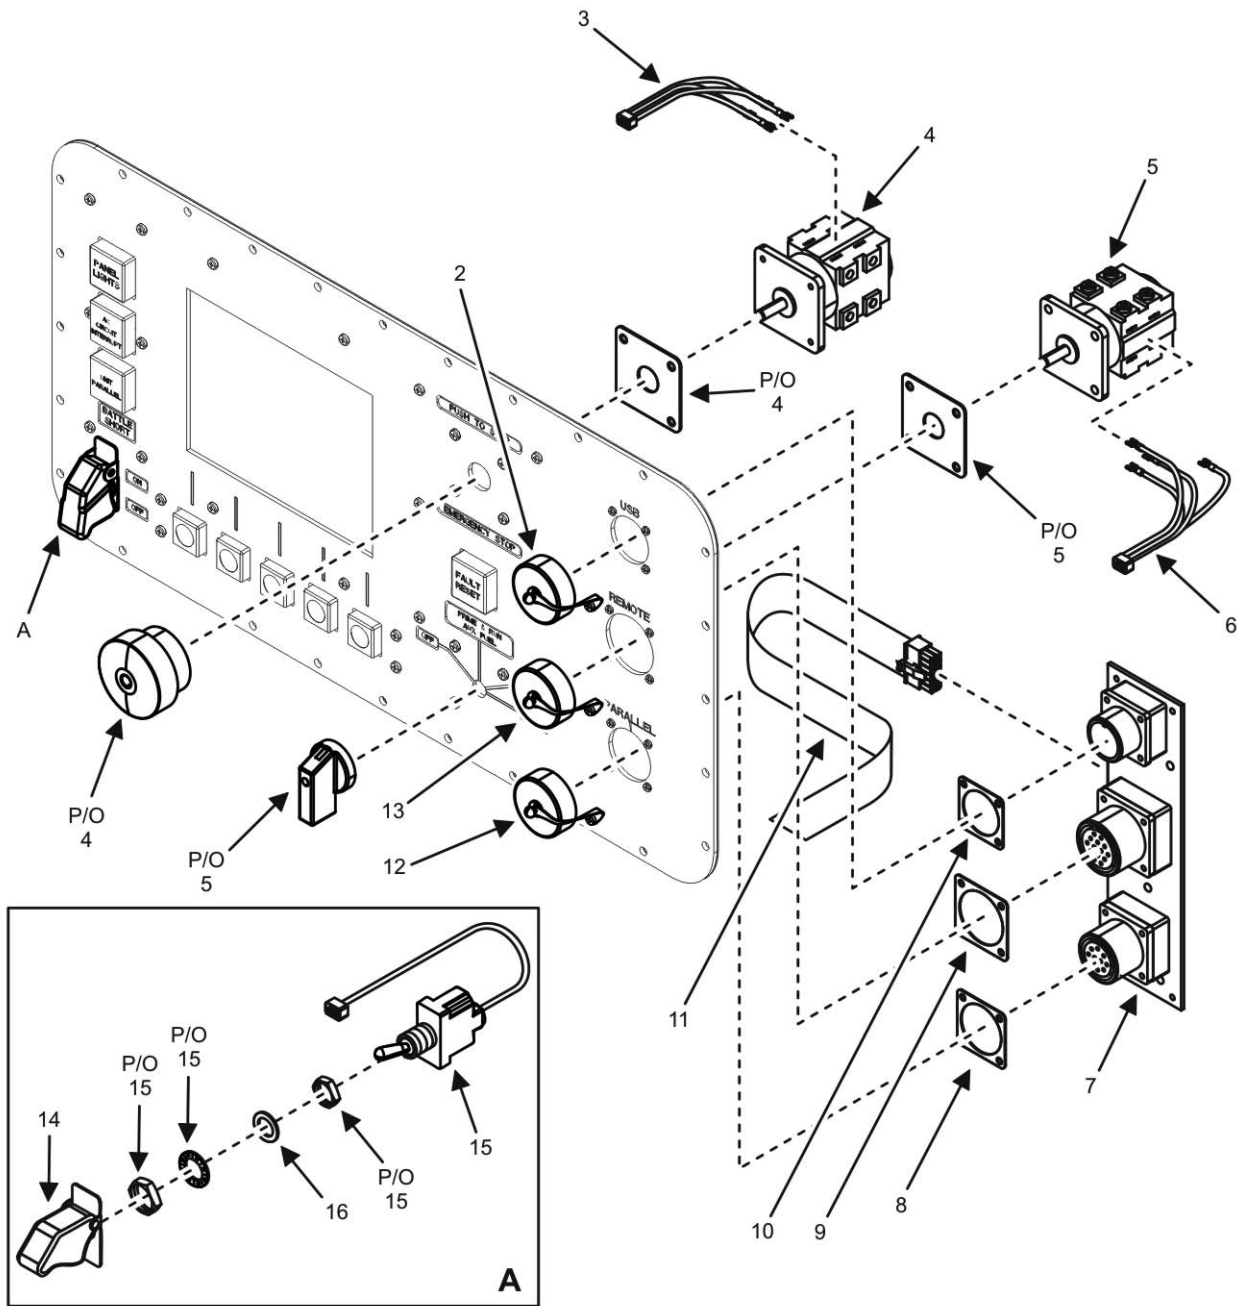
DCS Control Panel Assembly (Sheet 2 of 6).
